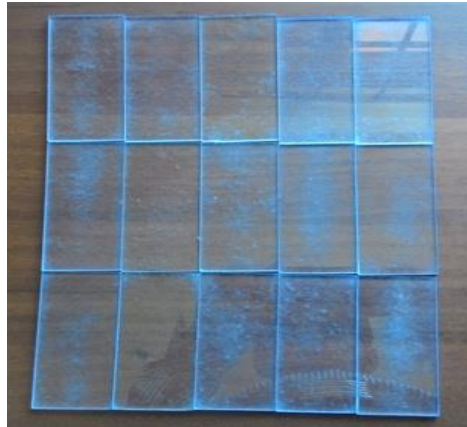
Photographic view of Acrylic plastic specimen before welding process
